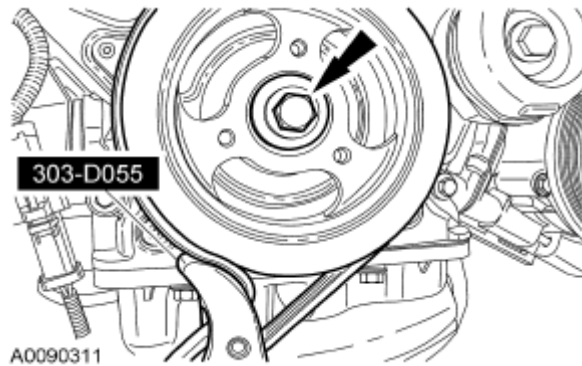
Locating Special Tool And Crankshaft Pulley Bolt
